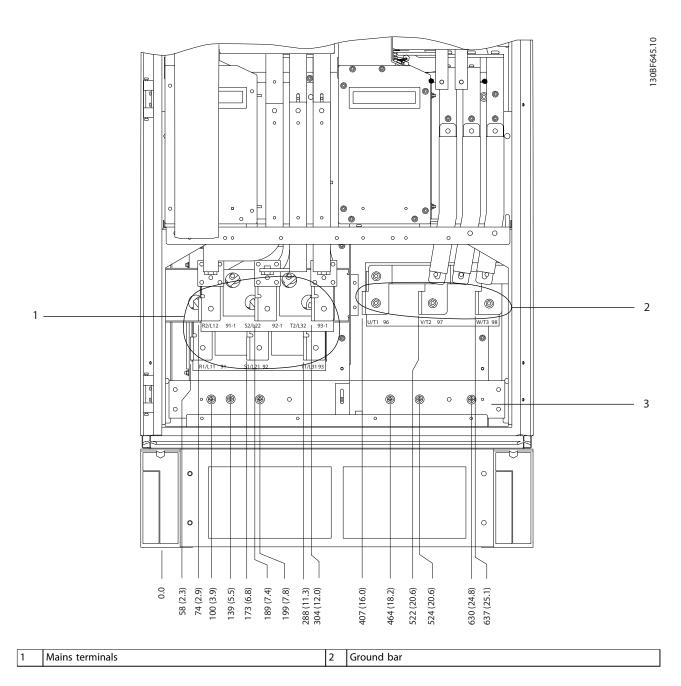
Terminal Dimensions for F10-F13 Rectifier Cabinet, Front View
